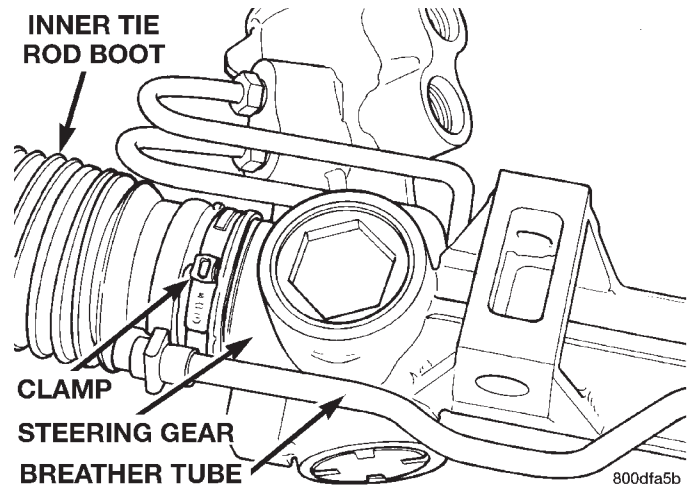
Tie Rod Boot To Steering Gear Clamp
